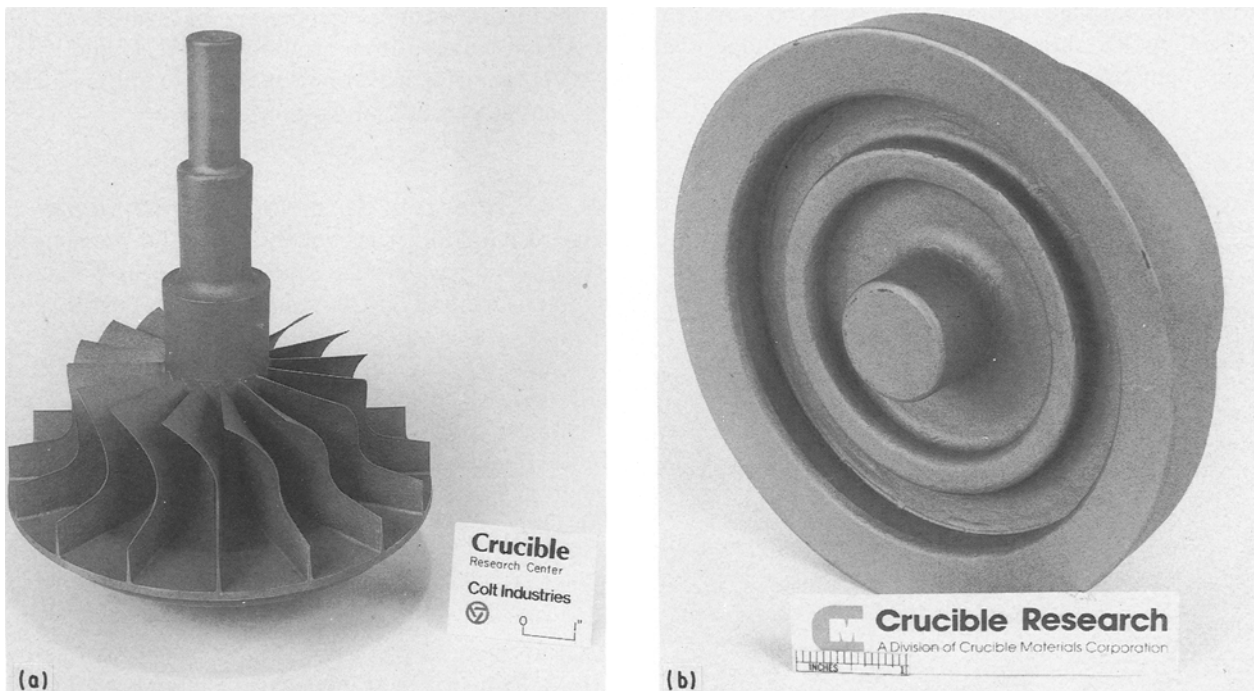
(a) Turbine engine compressor rotor produced by HIP of α_2 PREP powder and (b) machining preform produced by HIP of gas-atomized γ powder using the ceramic mould process [180].
